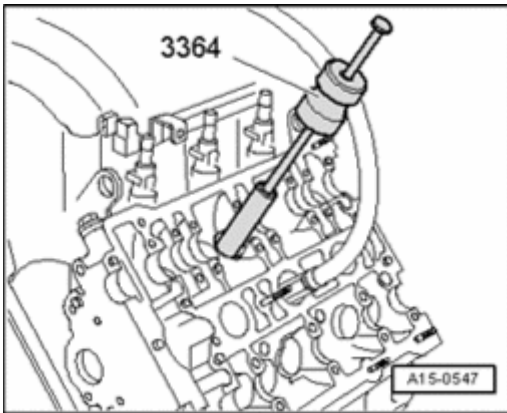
Pulling Off Valve Stem Oil Seals Using Valve Seal Removal Tool 3364
